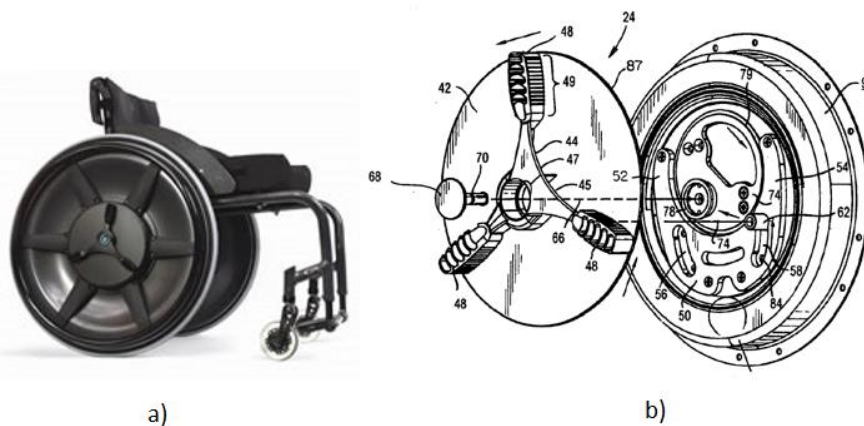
a) View of the MagicWheels. b) Exploding view of the mechanism.
